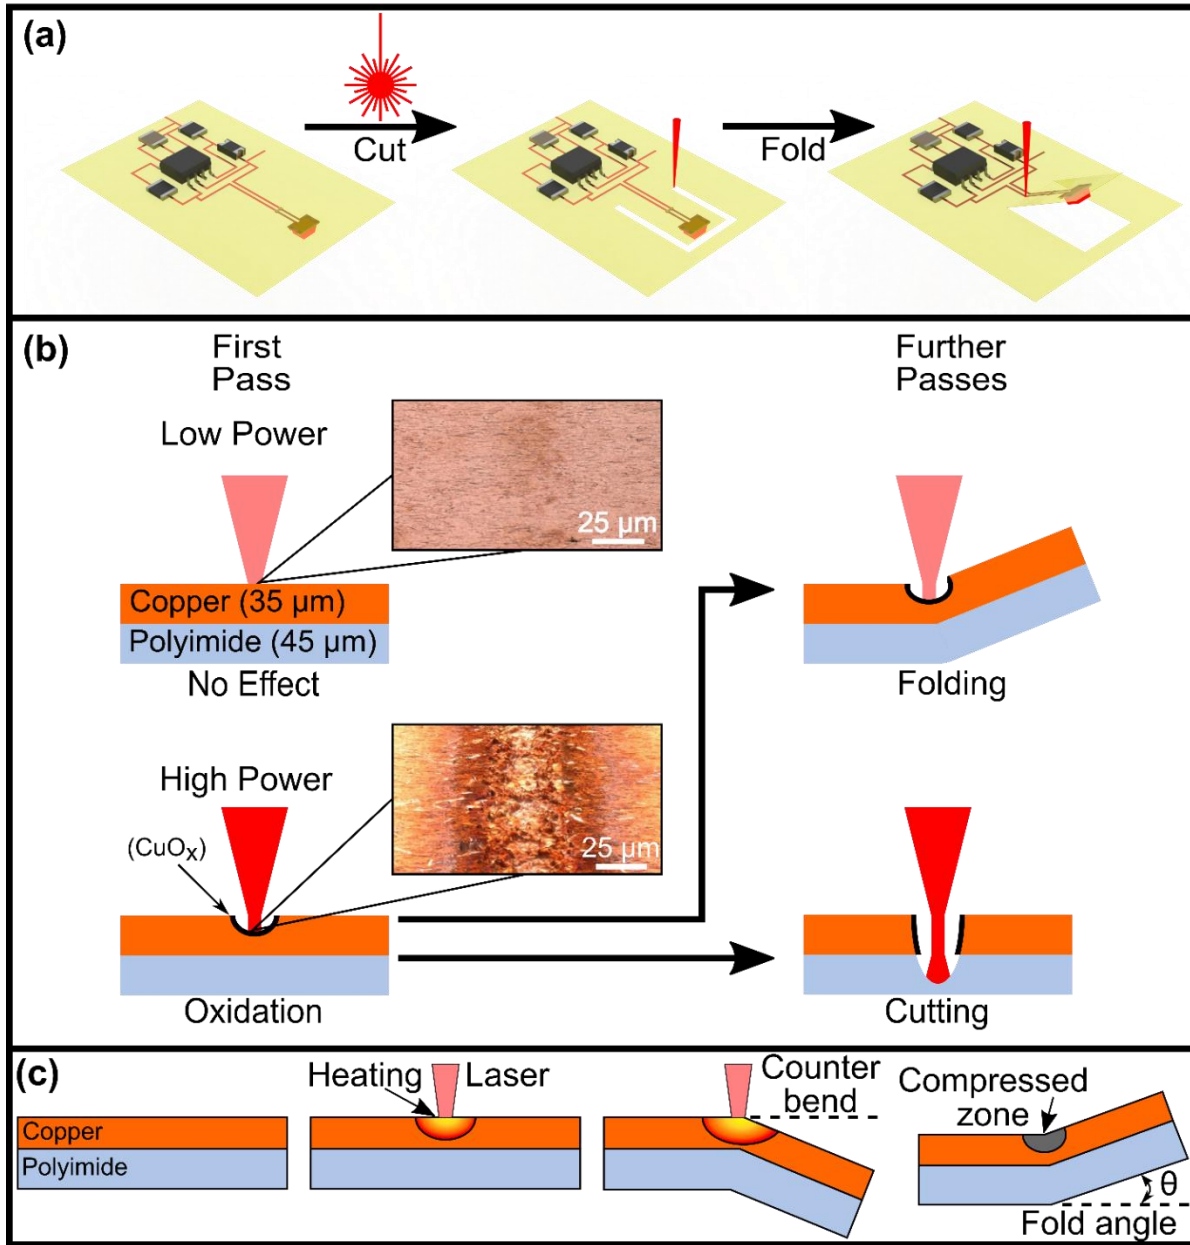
Schematic of the process (a) of cutting and laser forming (folding) a flexible printed circuit board (PCB) into a 3D shape using the same laser. Surface mount components are soldered to the board before the laser cuts out the fold region before laser forming to produce the 3D structure. The laser light is poorly absorbed (b) by copper, so nothing happens initially with low laser powers. A single pass at higher power causes mild ablation and some surface oxidation which enables folding with sustained low-power lasing. Repeated lasing with higher powers leads to cutting through the entire substrate. The temperature gradient mechanism (c) begins with a scanning laser heating the surface layers of the substrate. The thermal gradient leads to a thermal expansion gradient through the thickness of the material, causing the piece to initially bend away from the laser as the upper layers expands more. The thermal expansion is resisted by the cooler portions and is encoded as plastic compressive stresses that causes the piece to fold toward the laser after the laser has passed and the scan line cools, resulting in a permanent fold.
